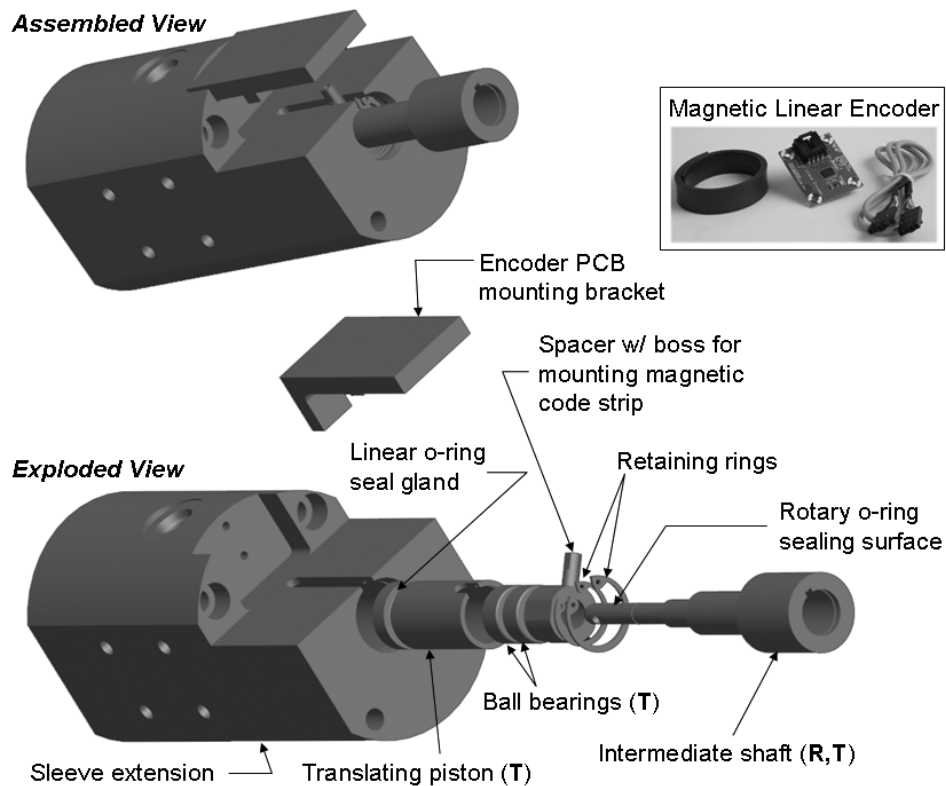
Assembled and exploded views of the drive mechanism illustrating its various components. The mechanism shown in this figure uses a magnetic linear encoder to sense the spool's axial position. A boss protruding from the side of the translating piston enables the attachment of a magnetic code strip that is read by the sensor mounted on the sleeve extension.
